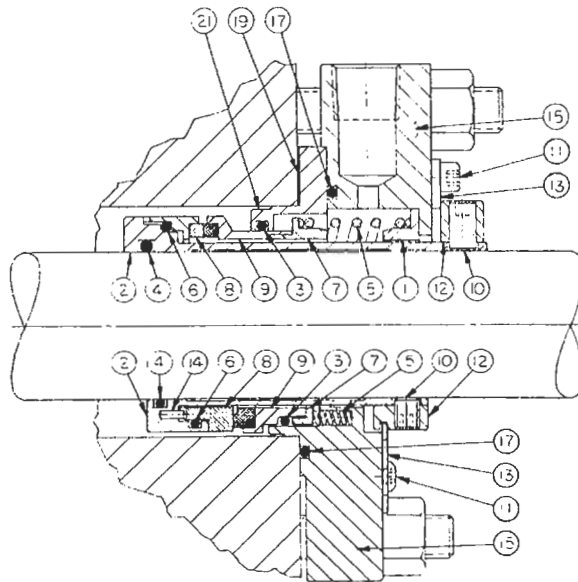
Two conventional mechanical seals with carbon holder driven by modified set screw (upper half) and horizontal pin (lower half).
